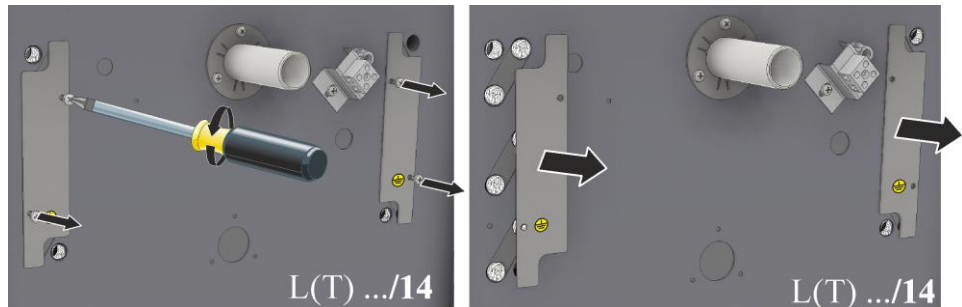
Dismantling cover plates (only model L(T) .../14) (similar to picture)
